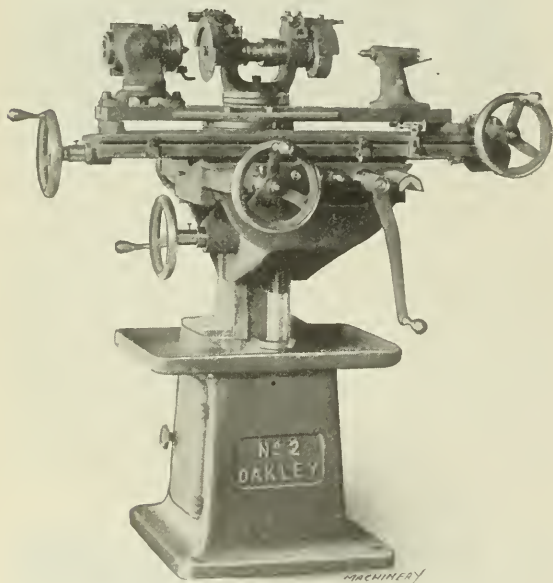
No. 2 Cutter and Tool Grinder built by Oakley Machine Tool Co.
